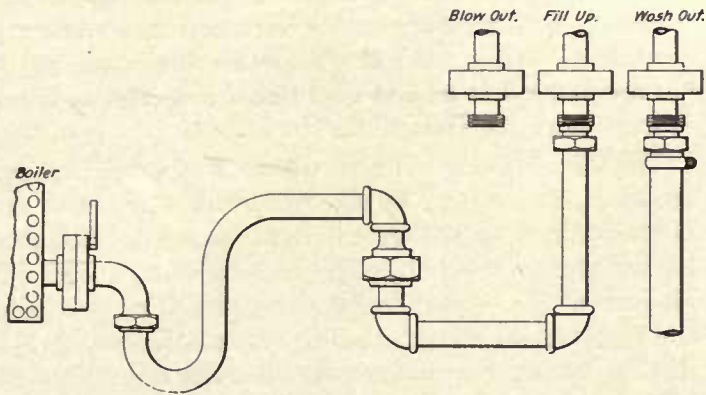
Ball Joint Pipe to Connect Blow Out and Filling Up Lines of Boiler Changing System.
